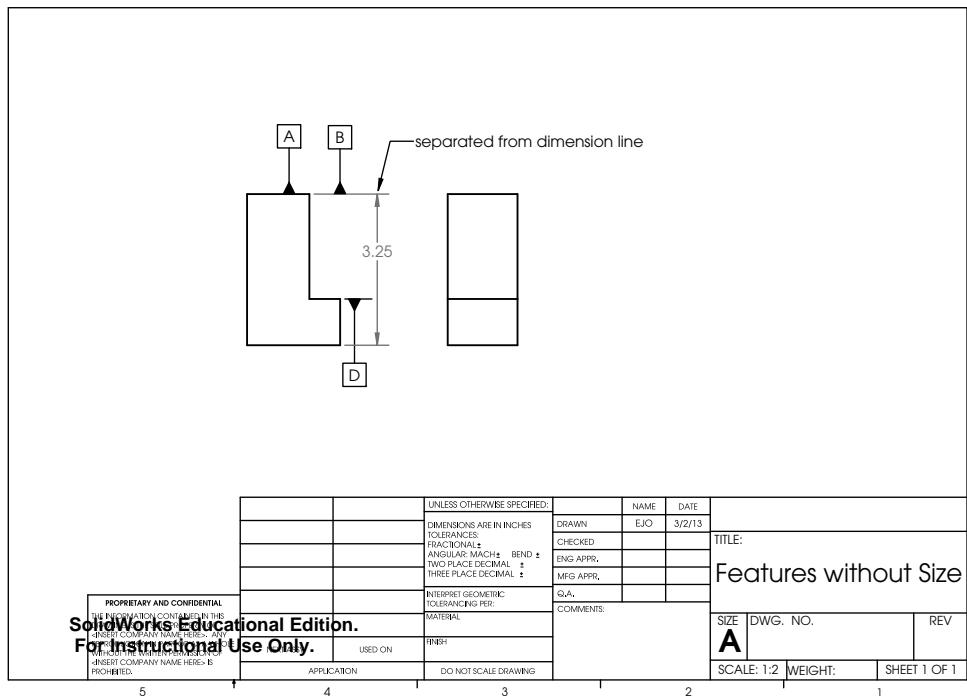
Specifying surfaces as datum features. The datum symbol may be placed directly on the surface or off an extension line from the surface. The datum symbol must be separated from the dimension line. Courtesy of Elizabeth J. Orwin in SolidWorks™.
